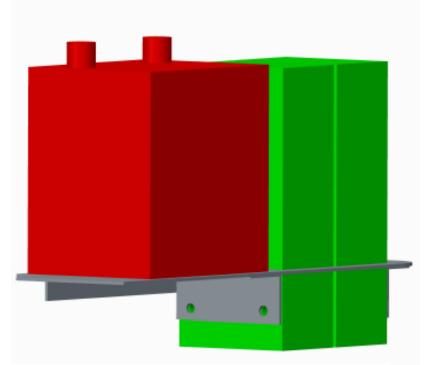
Assembly showing how the power supplies (green) are fastened to the plate and how the battery (red) rests on the plate. Steel strips not pictured.
